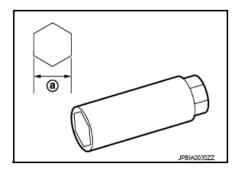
Identifying Spark Plug Wrench Dimension Courtesy of NISSAN MOTOR CO., U.S.A.
